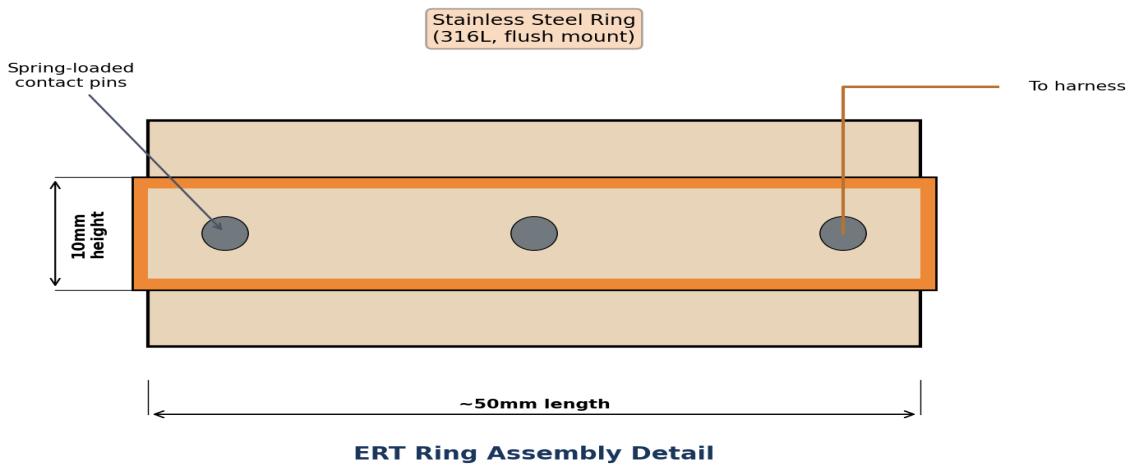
ERT ring collar assembly showing stainless steel ring (316L) flush-mounted on insulating collar. Spring-loaded contact pins ensure reliable electrical connection. Ring dimensions: 5mm width x 16mm OD, approximately 50mm collar length.
